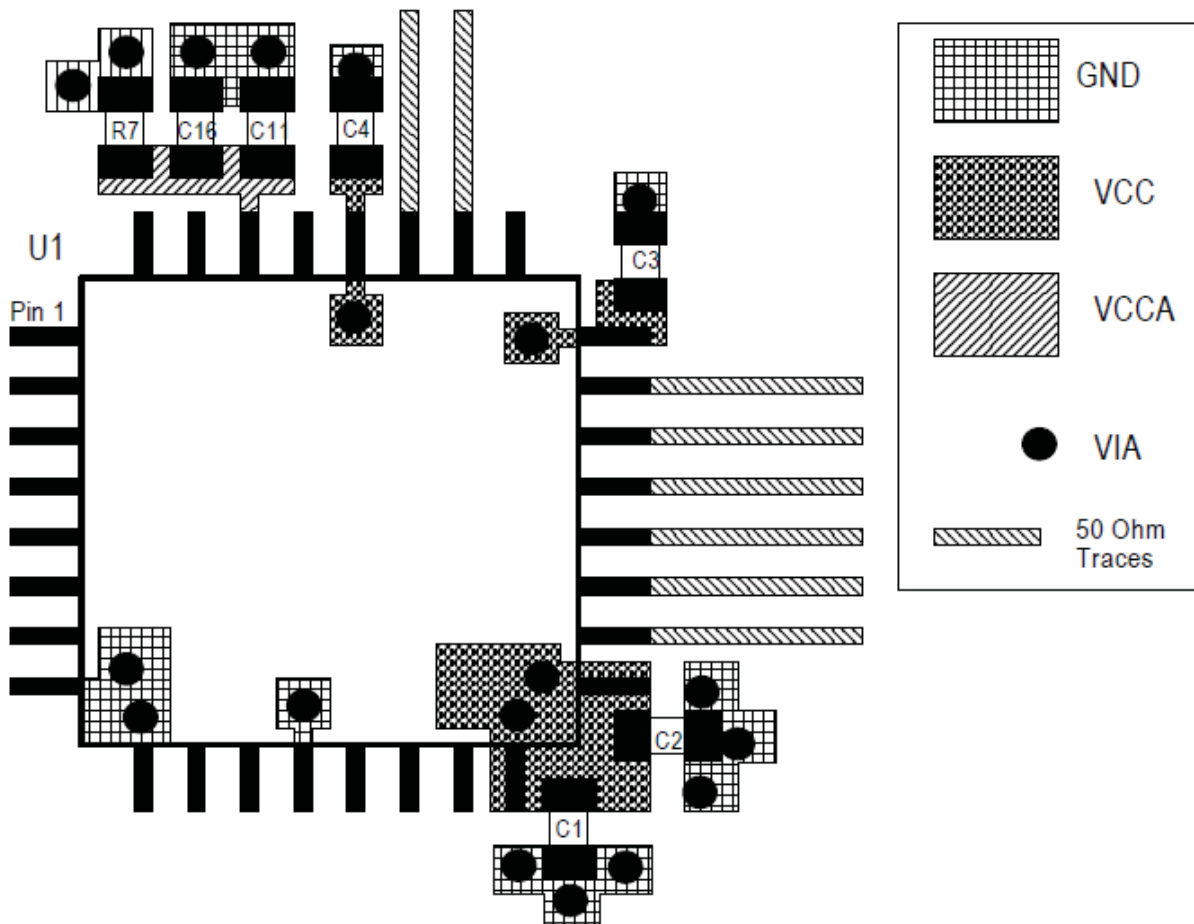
B. PCB BOARD LAYOUT FOR 87993I
